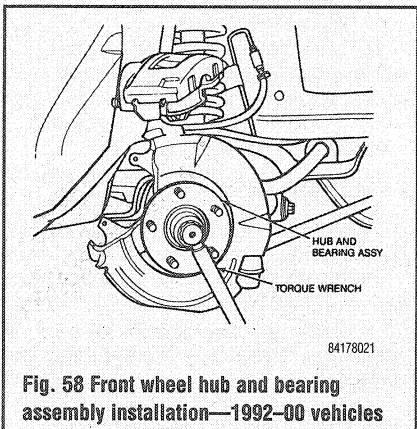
Front wheel hub and bearing assembly installation—1992-00 vehicles
